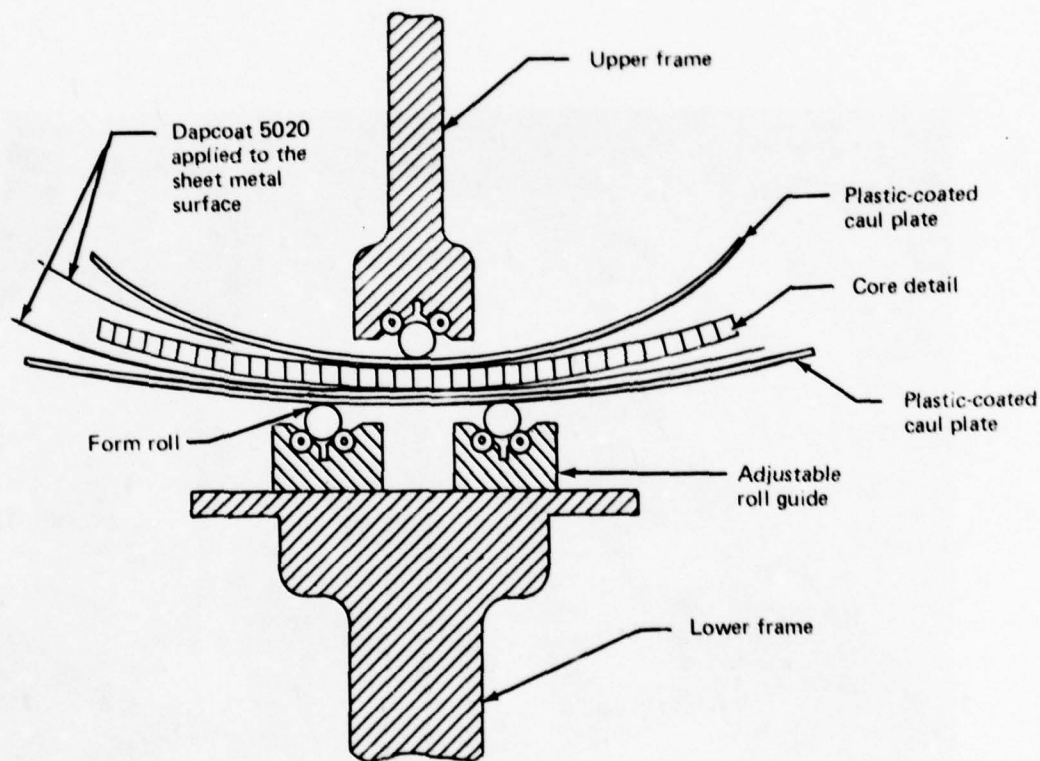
Farnham Roll Being Used to Form Honeycomb Core
